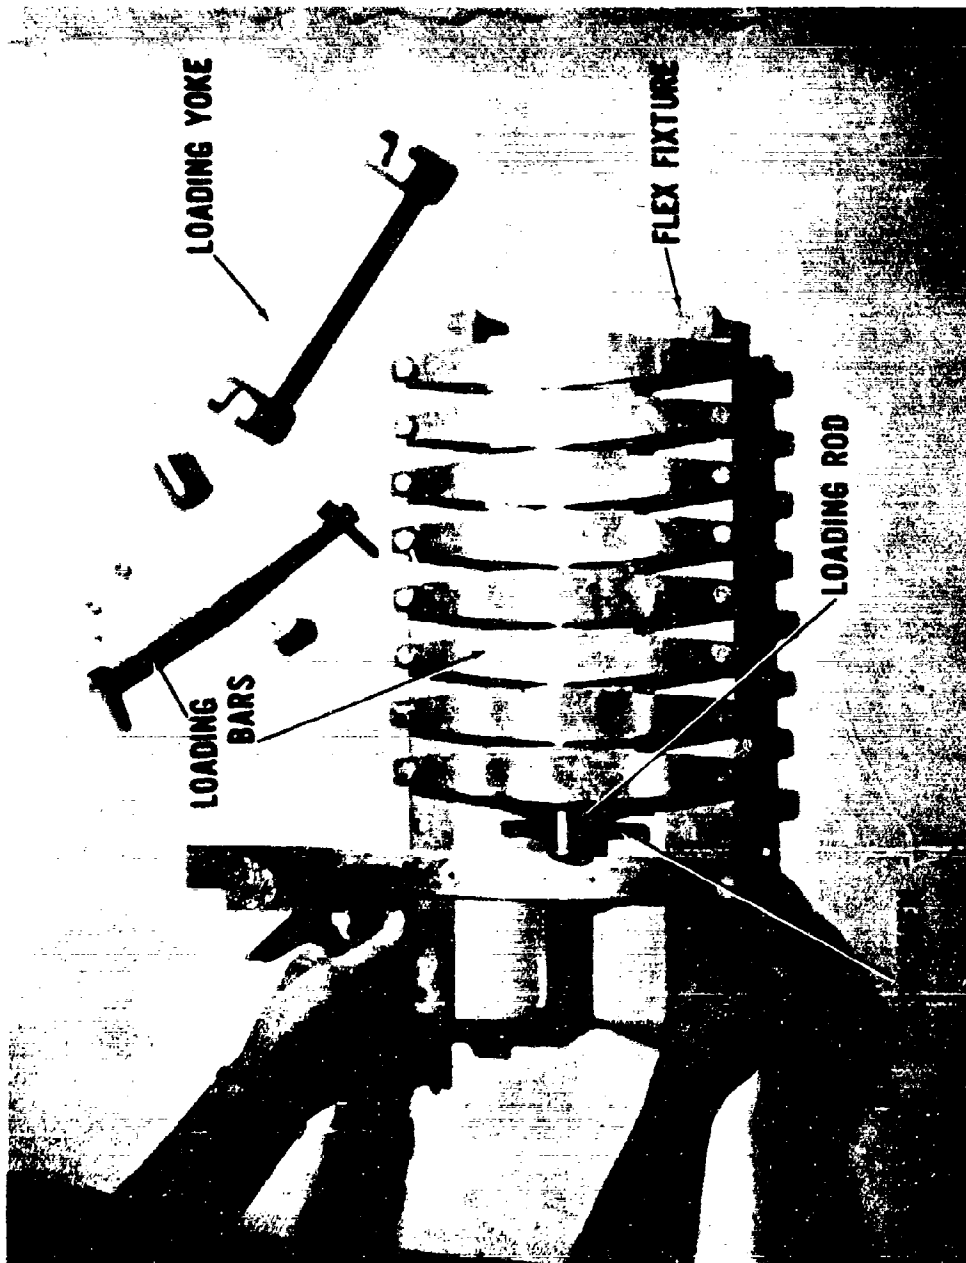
ASSEMBLY OF STATIC FLEXURAL LOADING FIXTURE
